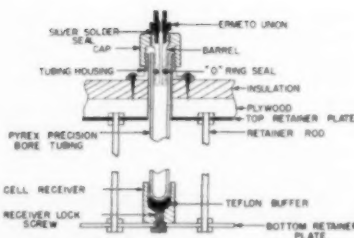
Schematic diagram of glass-to-metal pressure adapter assembly.
